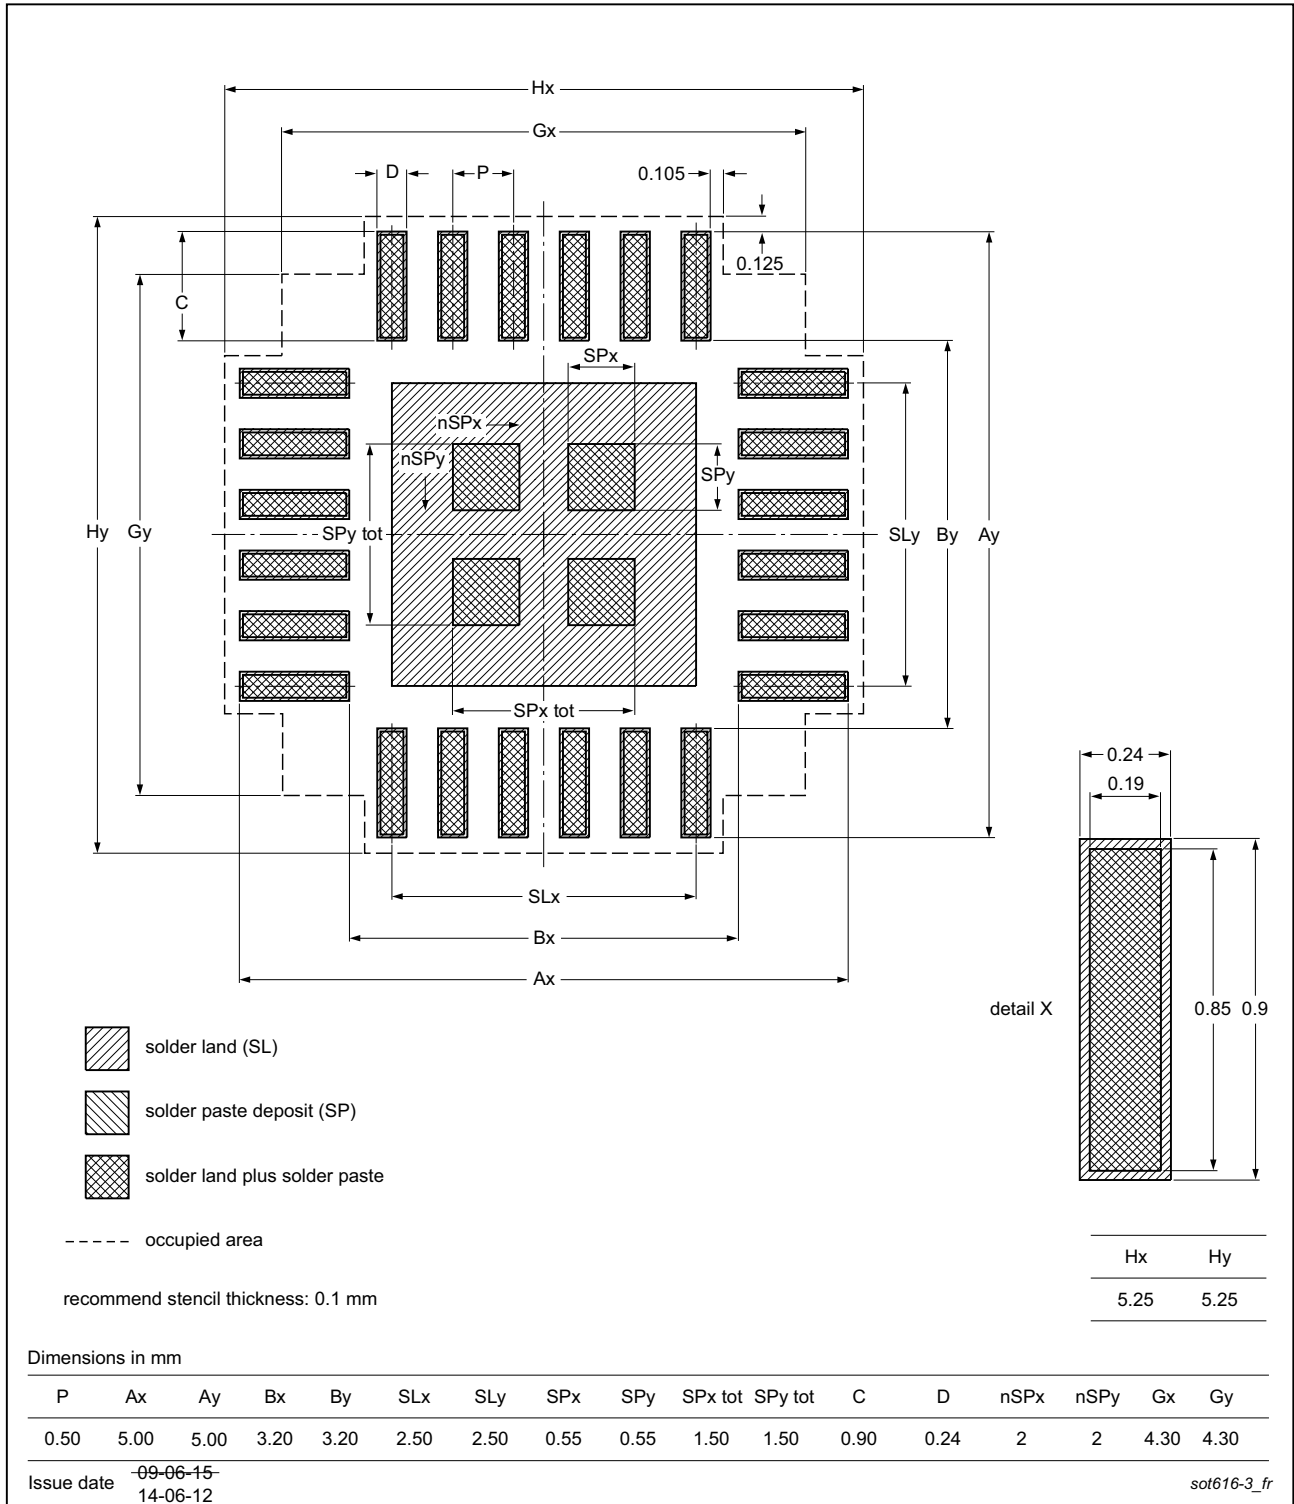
PCB footprint for SOT616-3 (HVQFN24); reflow soldering
